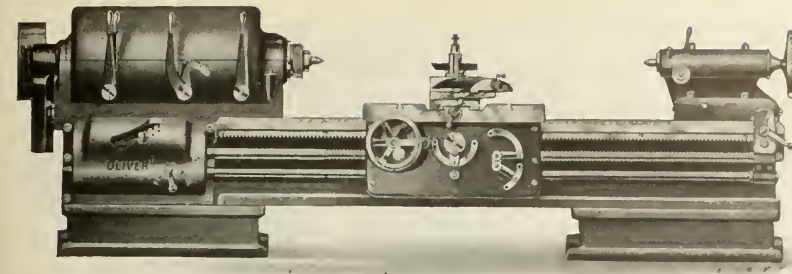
Oliver Heavy-duty 26-inch Engine Lathe
